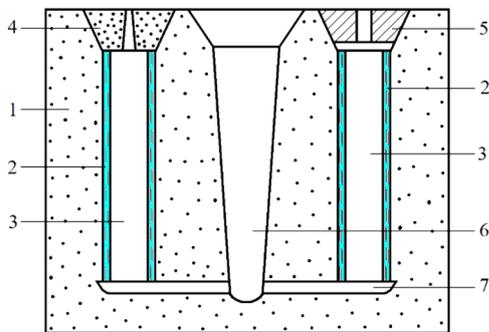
Scheme of casting mold for cast iron samples making that solidified and cooled under free and absolutely hindered linear shrinkage conditions:
